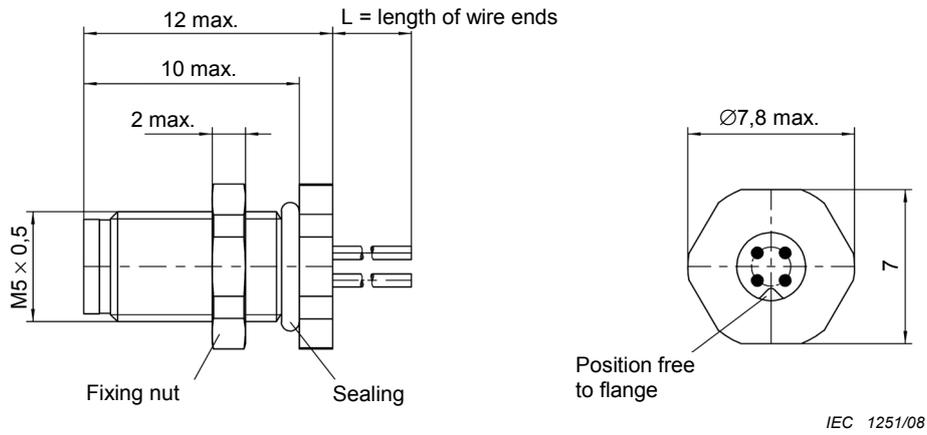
Fixed connector, male contacts, mounting with thread M5 x 0,5, with wire ends, single hole rear mounting, thread M5 x 0,5, mounting orientation
